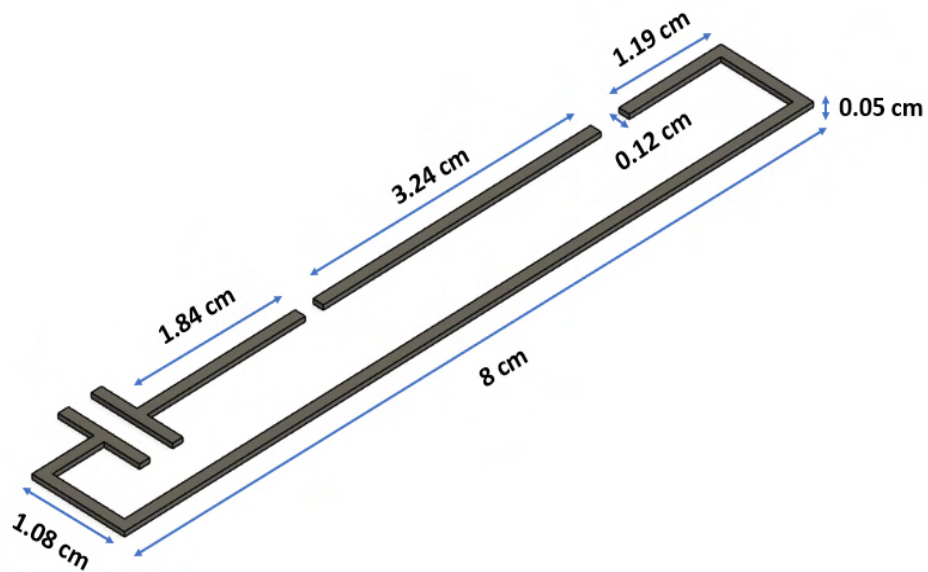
Design and dimensions of the 3D printed electronic circuit.
